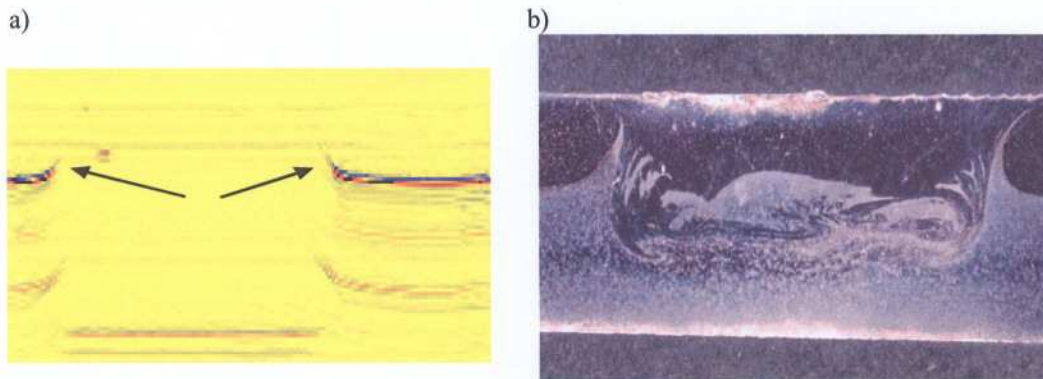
Cross-section of a first lap joint with the presence of hooking. Welding parameters: truncated pin, welding speed of 500 mm/min, spindle speed of 800 RPM, shoulder penetration of 0.1 mm. a) SAFT image (B-scan) obtained by immersion on the weld side and b) corresponding metallography
